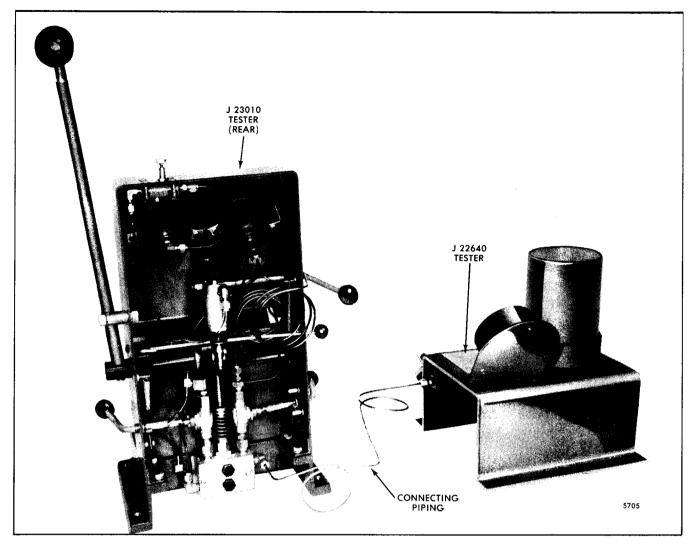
Injector Needle Valve Tester J 23010 with Auxiliary Tester J 22640
